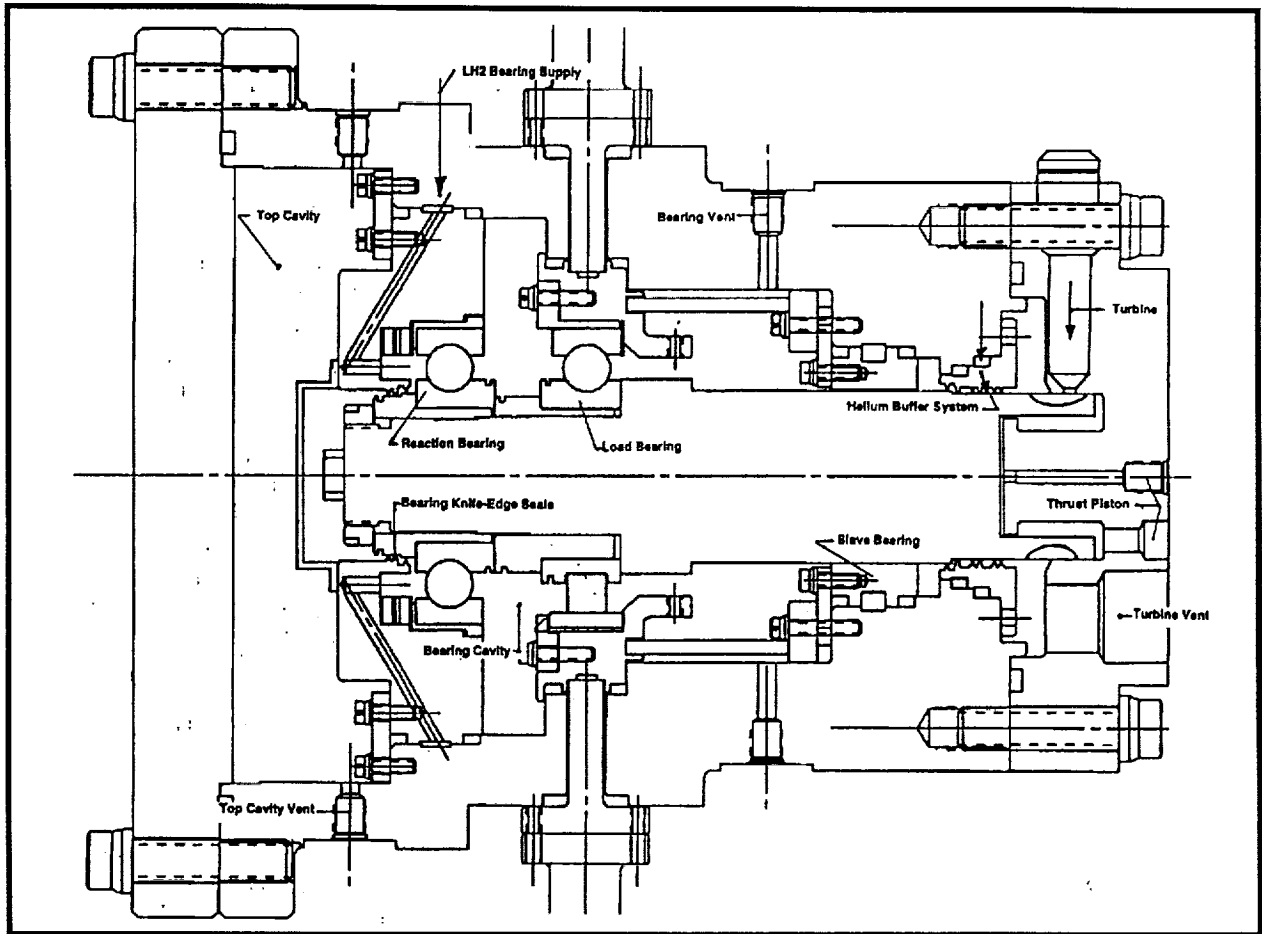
Fluid Film Bearing Tester Showing Optional Ball and Roller Bearing Installation
